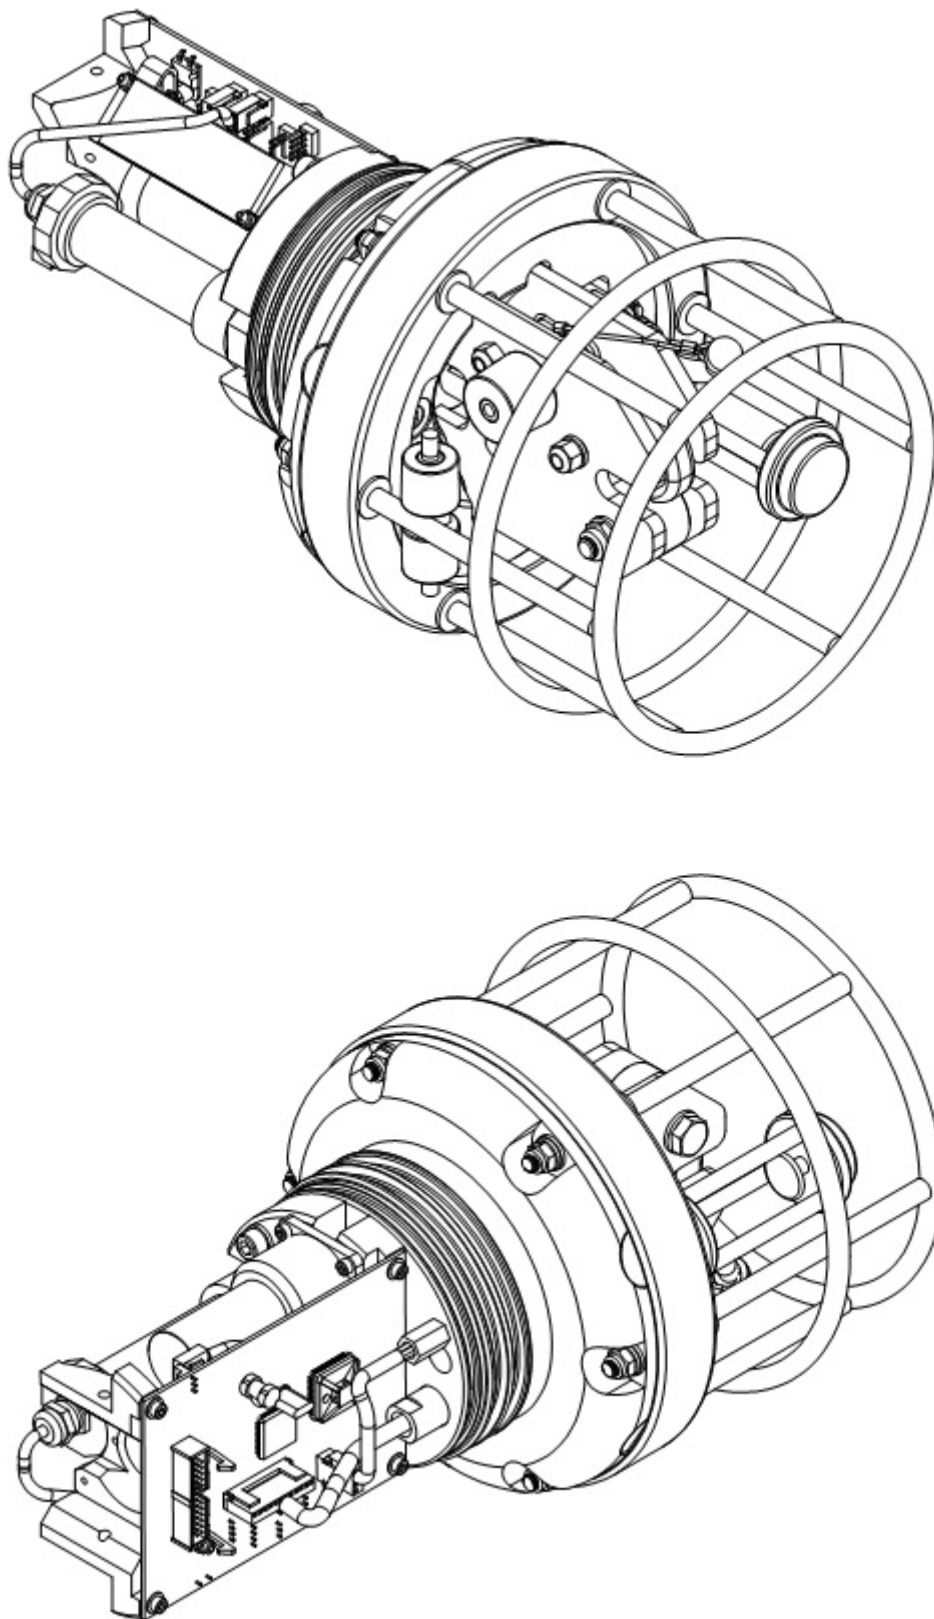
8000-043 TX/PRE-AMP BOARD – ISSUE C
